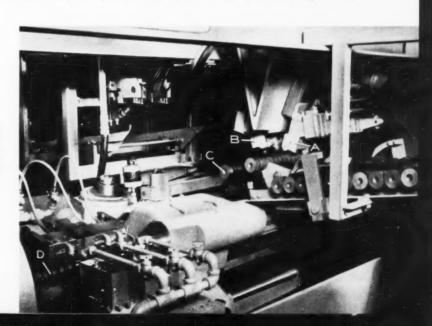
Successive steps in transferring camshafts to two Lo-swing automatic lathes and and to gaging stations that follow each machine operation, the camshafts being finally discharged to the conveyor line, ready for successive operations
